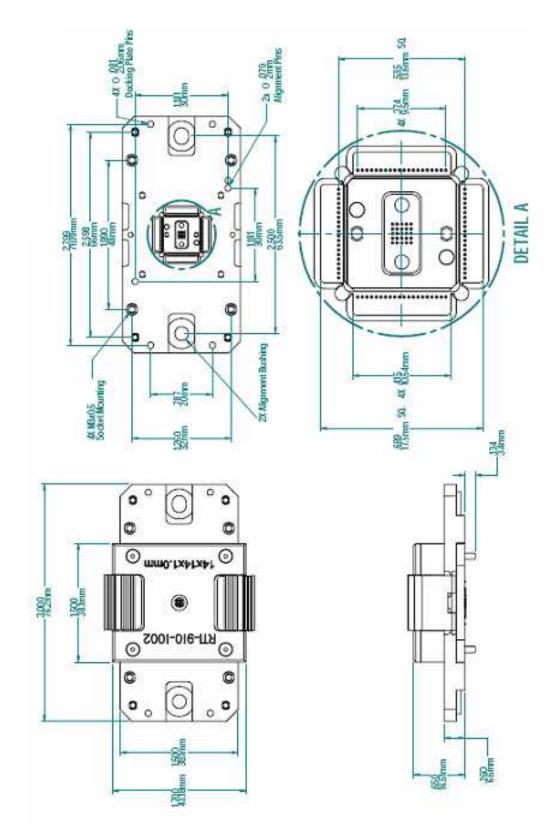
High speed dual channel 6-bit ADC (TQFN packaged) mounting socket mechanical drawing
